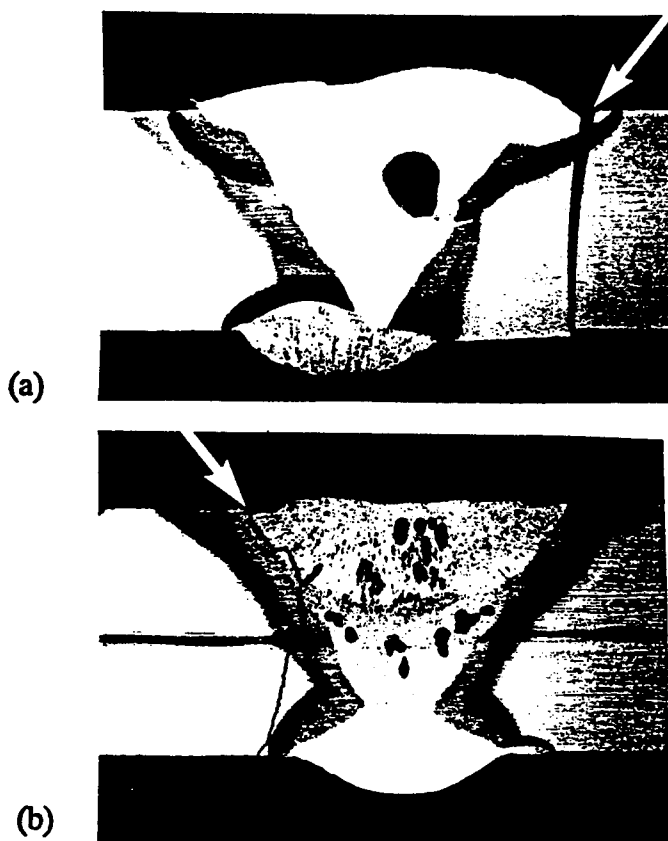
Examples of insignificant welding flaws. Groove weld failed from toe (arrowed) regardless of presence of (a) slag inclusion and (b) porosity.
